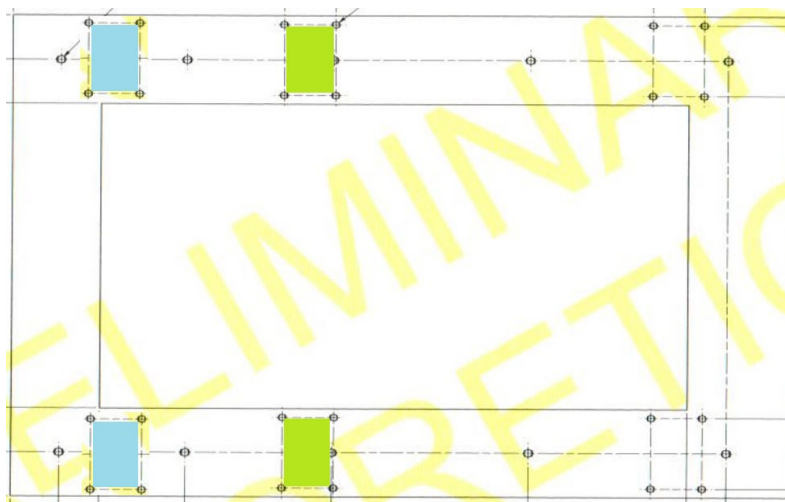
Rail Bearing Mount Plate (2921-396) showing the relocation of bearing attachments from the current drawing green position to the blue position
